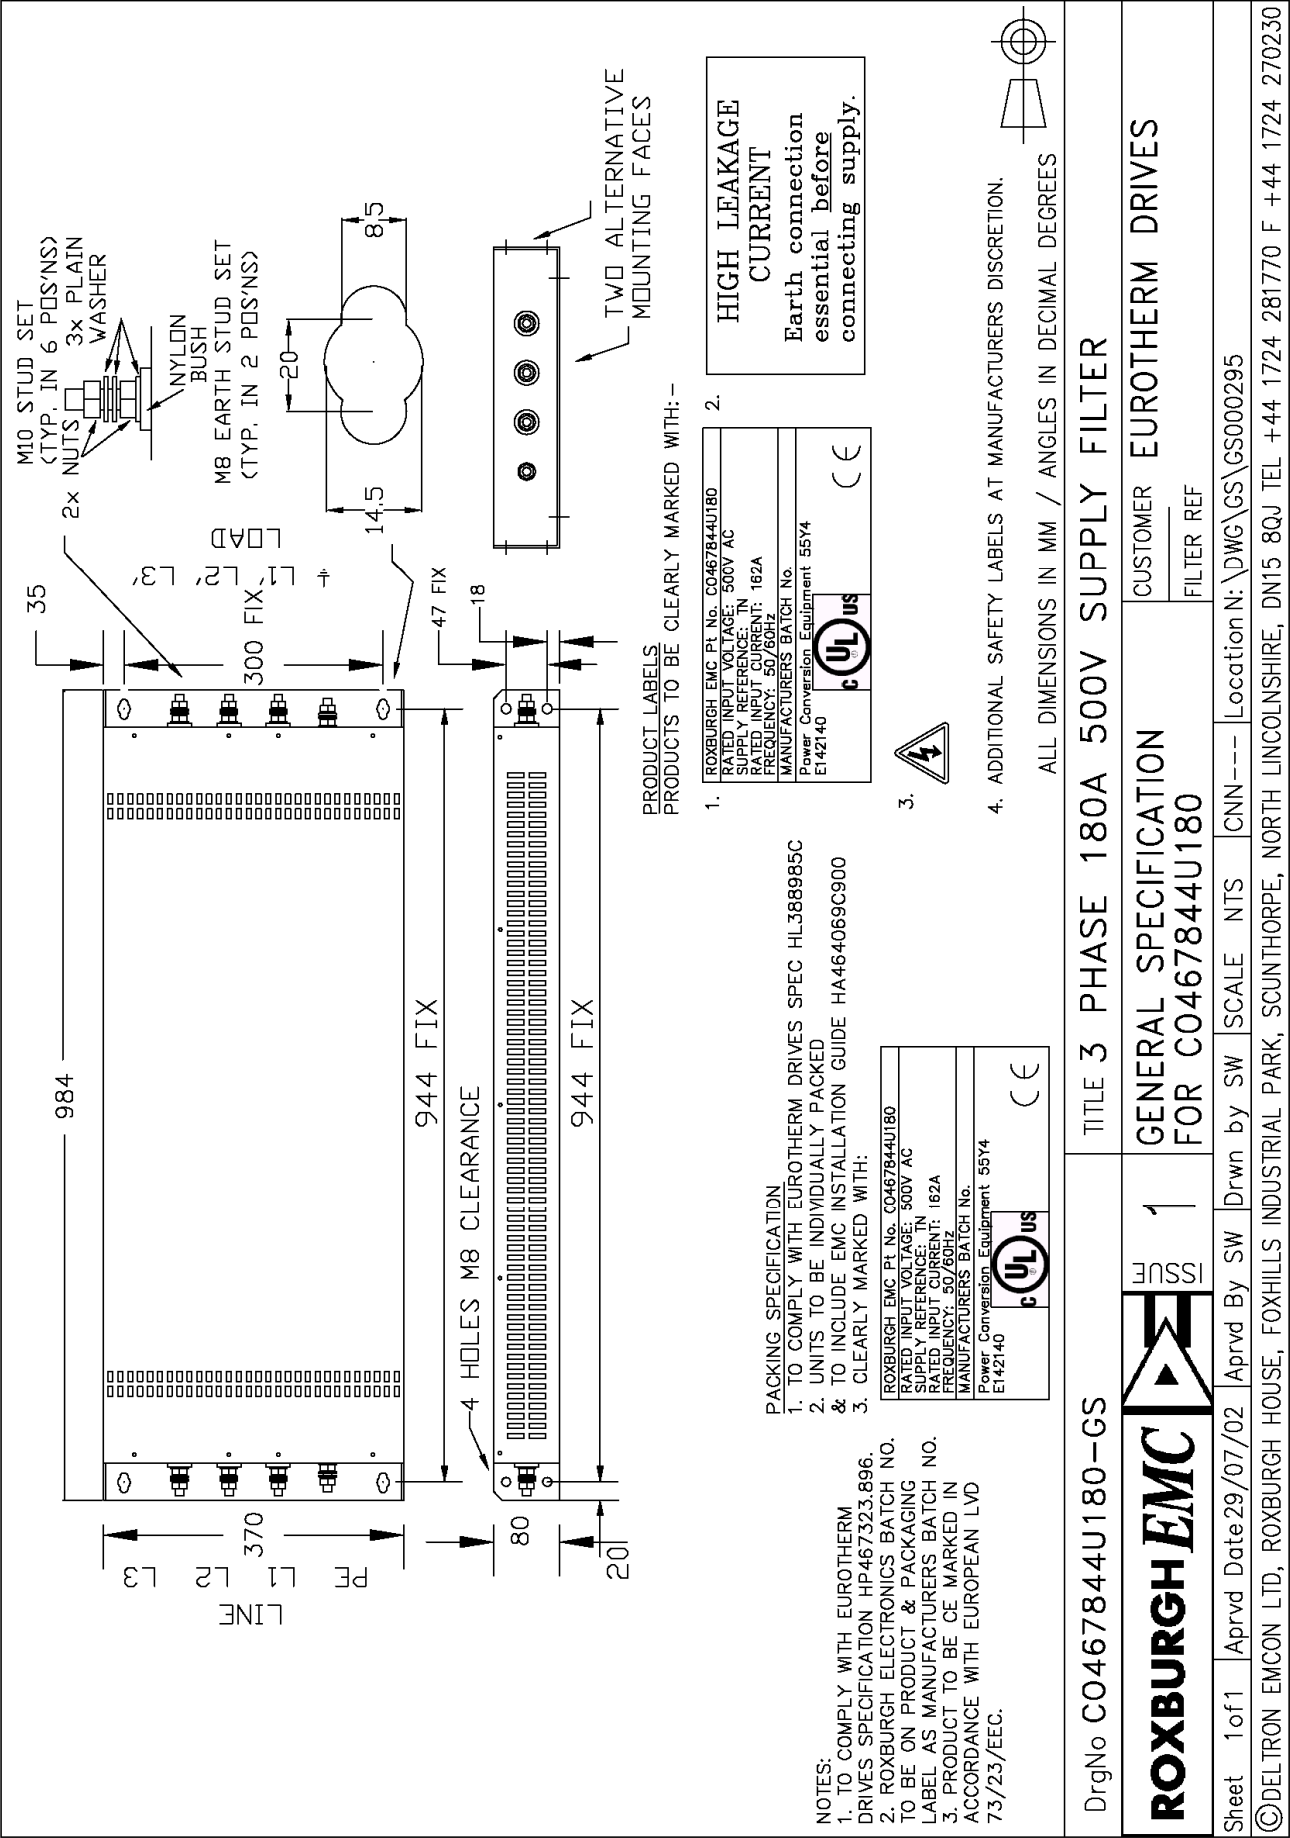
Filter Mounting Details, Part No. CO467844U180 for Frame 3 : 180 Amp
